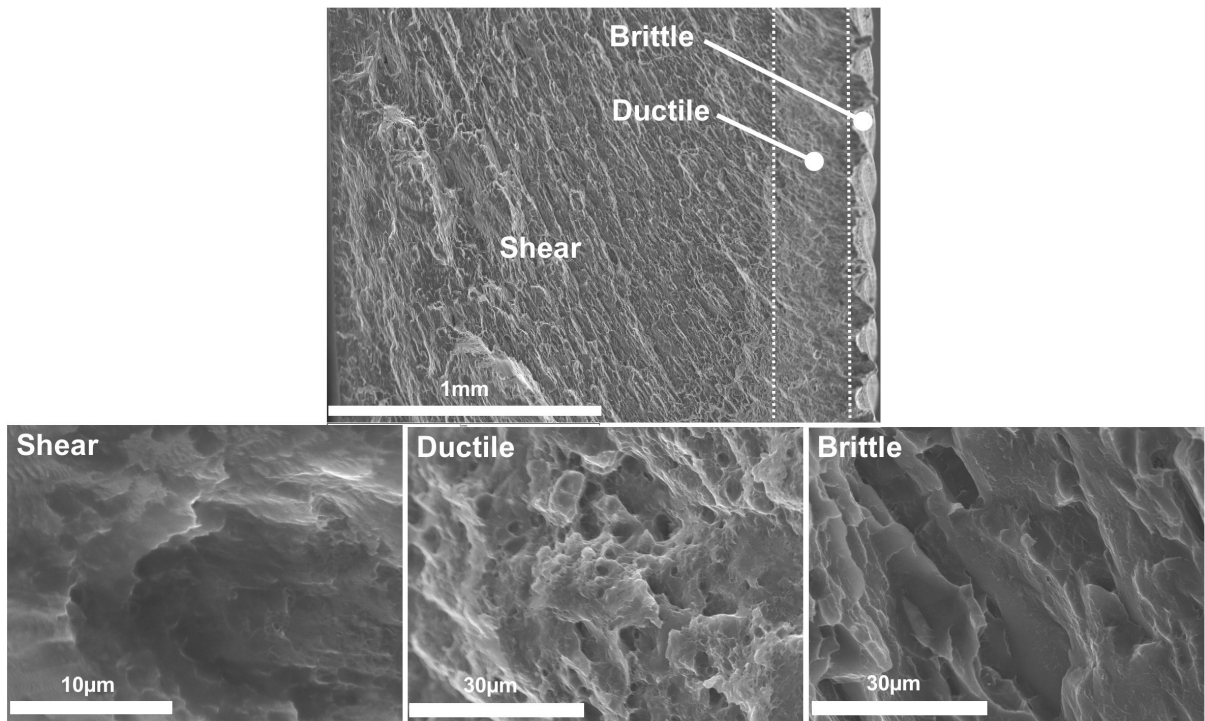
Tensile fractographies of FSW butt welds.
